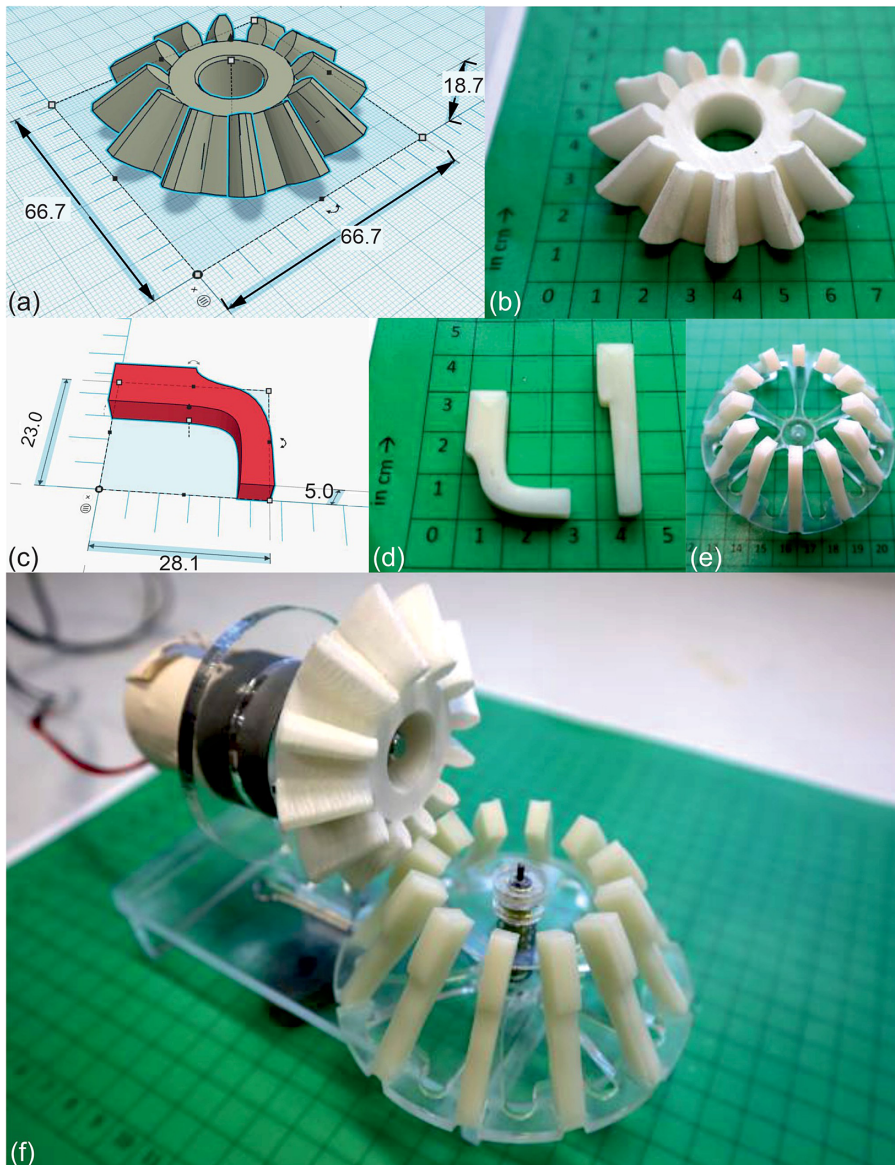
Thermally switchable ‘bevel gearbox’: (a) A technical drawing of the input bevel gear and (b) the additively manufactured ‘output bevel gear’. (c) A technical drawing of one of the ‘teeth’ of the ‘bevel gear’, (d, left) an additively manufactured ‘tooth’, (d, right) a ‘tooth’ after thermomechanical treatment to implement thermoresponsiveness, and (e) the assembled output ‘bevel gear’ containing 12 thermoresponsive ‘teeth’. (f) Gearbox consisting of the input bevel gear and the assembled ‘output bevel gear’. In panels (a,c), the dimensions are provided in millimetres.
